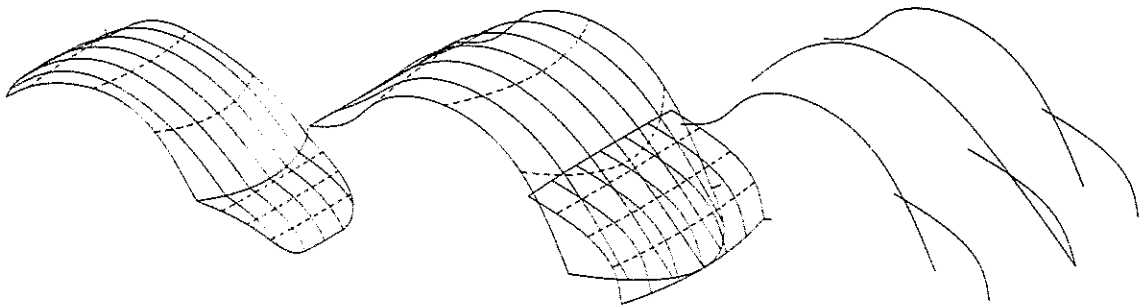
Trimmed surfaces, base surfaces, and wires for the top surfaces
